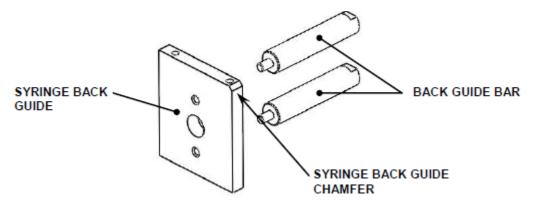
Screwing two Syringe Back Guide Bar on the Syringe Back Guide
